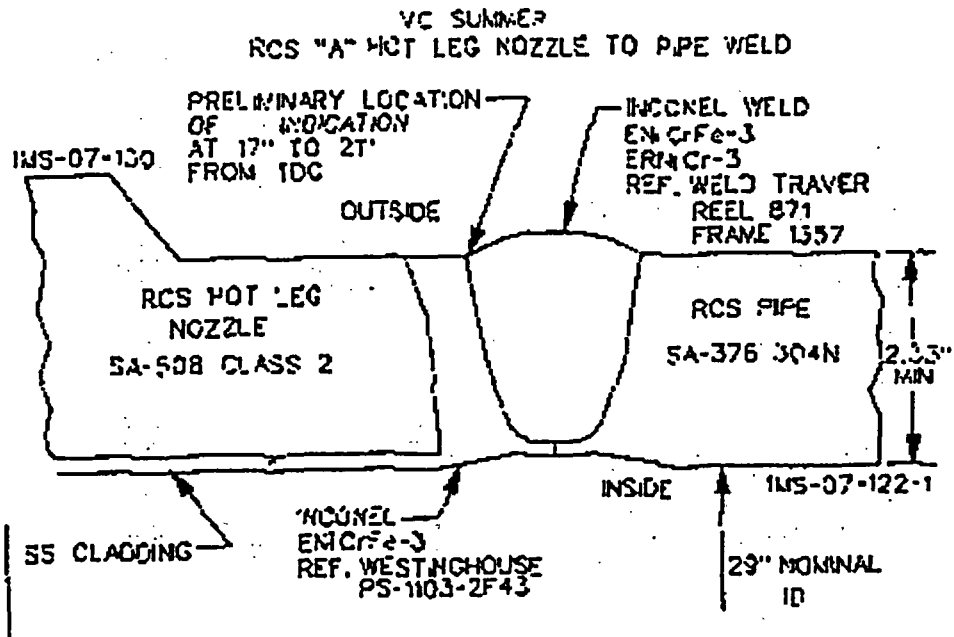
Geometry of V.C. Summer bi-metallic weld joint
